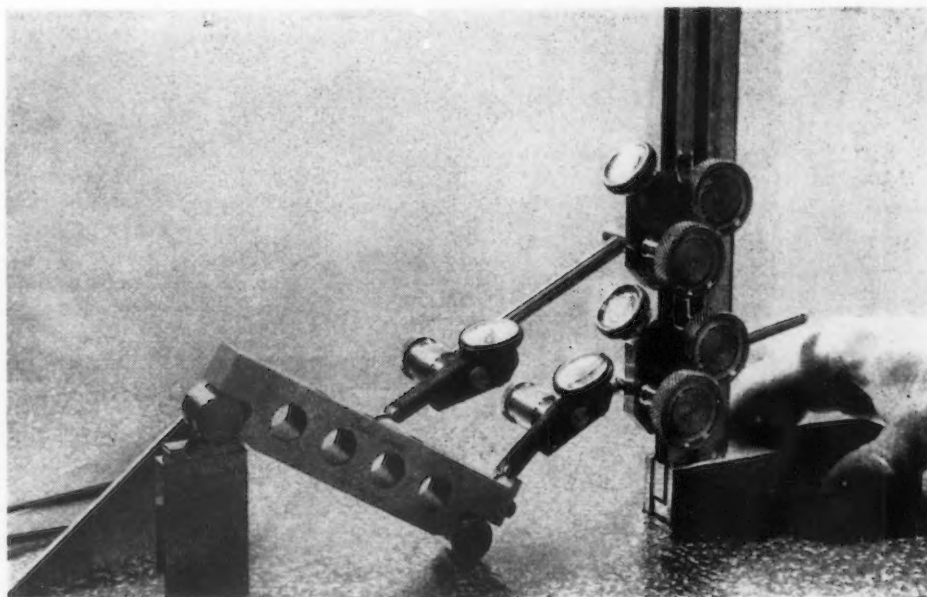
The sine bar can be used for inspection of short run production. Here, a bevel gear is being tested with a sine bar and a precision surface plate that was substituted for a master flat.
